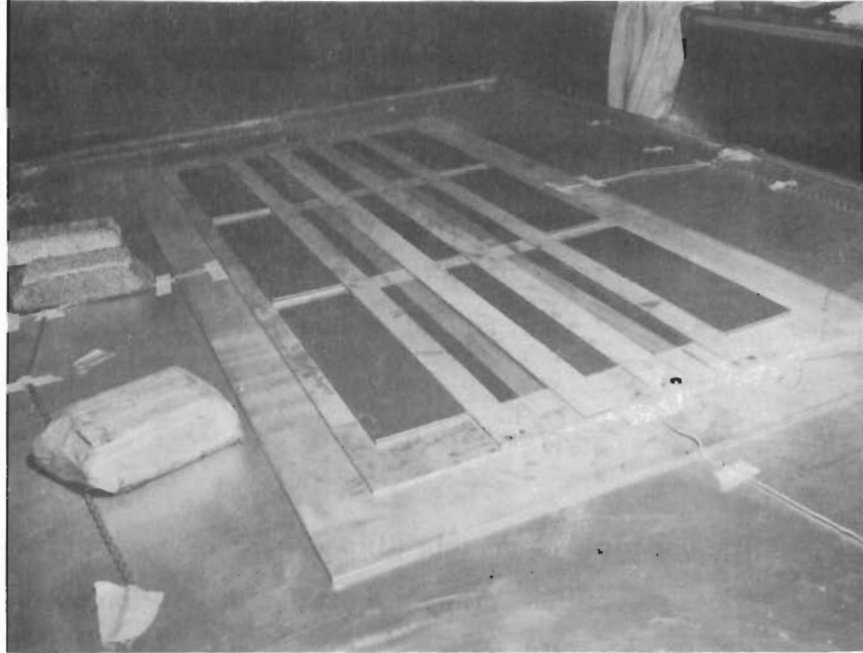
LAYUP OF THREE 12" x 18" BONDED PANEL ASSEMBLIES
